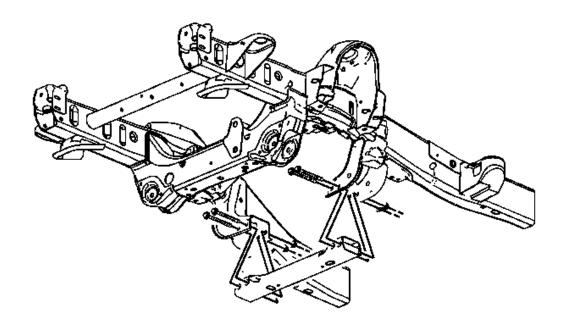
View Of Vehicle Crossbar, Bolts & Nuts Courtesy of GENERAL MOTORS CORP.
